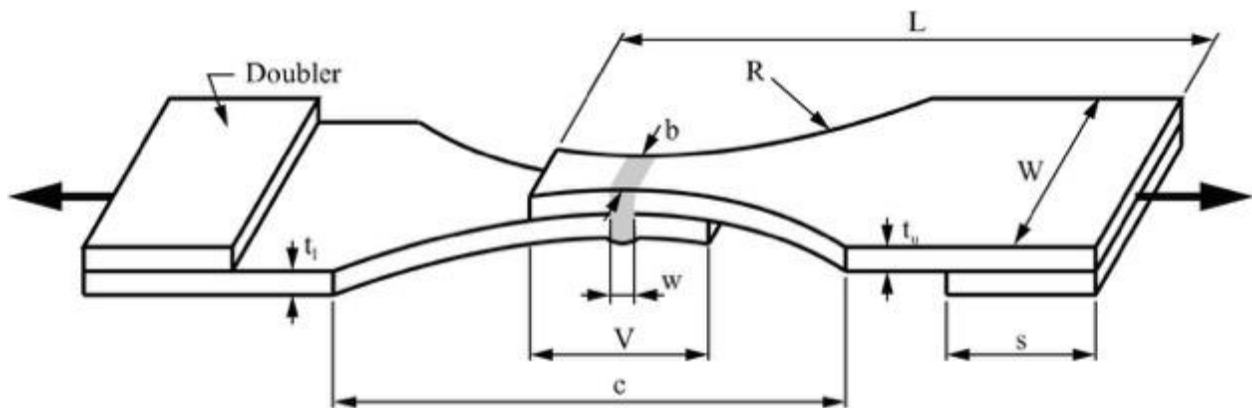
EDM cut Al-Mg lap welds Dog bone geometry design for fatigue testing from Su et al. [62].
